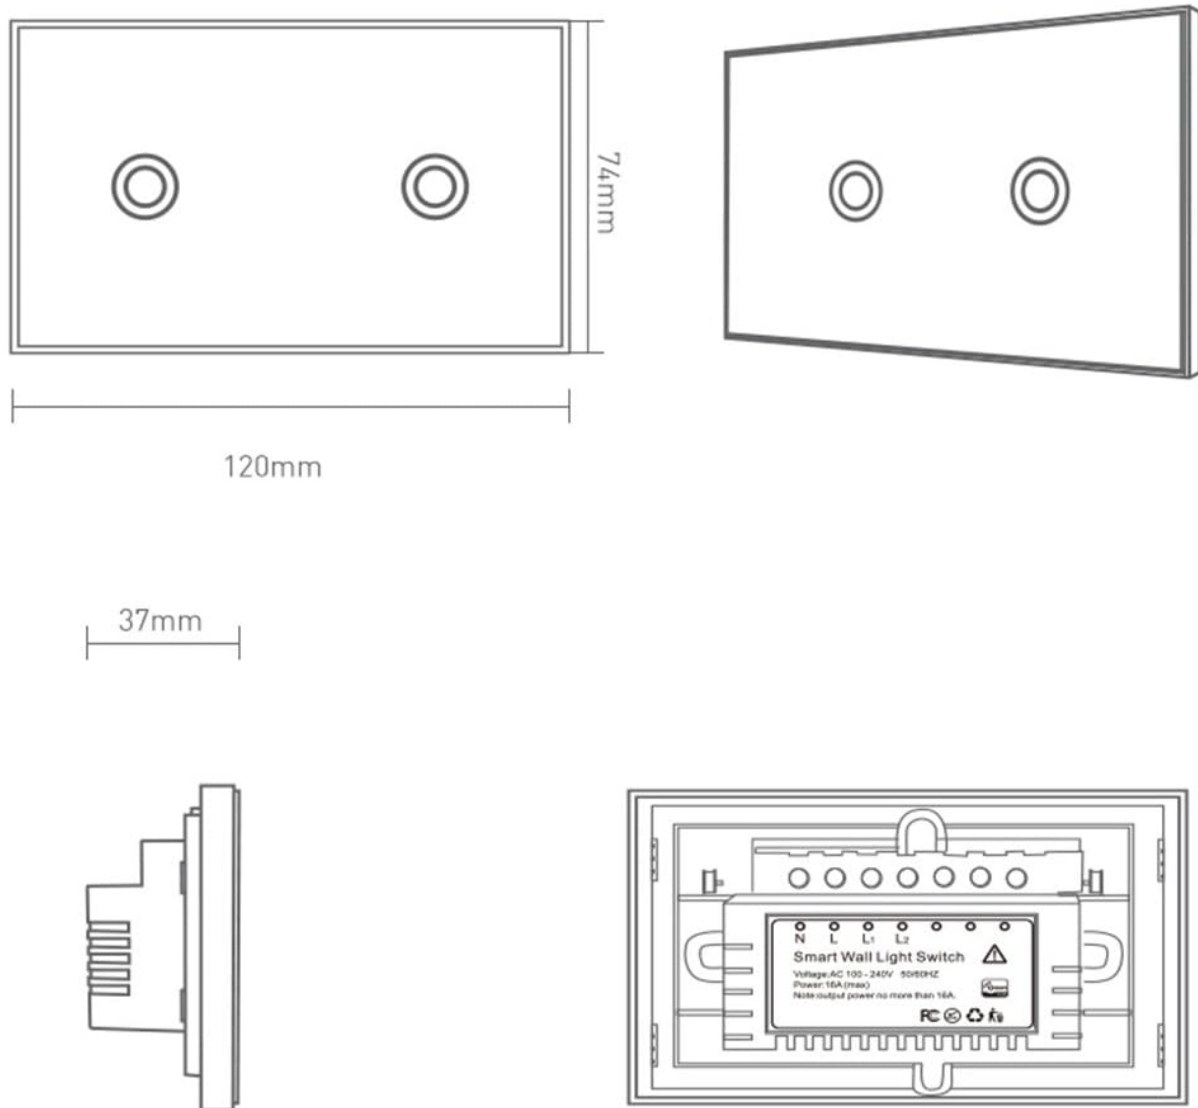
Detailed technical drawing showing the dimensions (120mm x 74mm x 37mm) and internal components of the smart light switch.
